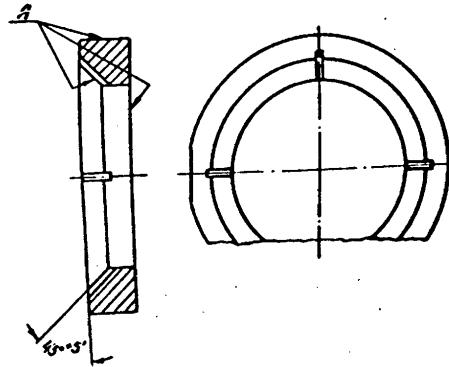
LAPING TOOL T-4/105 FOR EXHAUST VALVE SEAT
